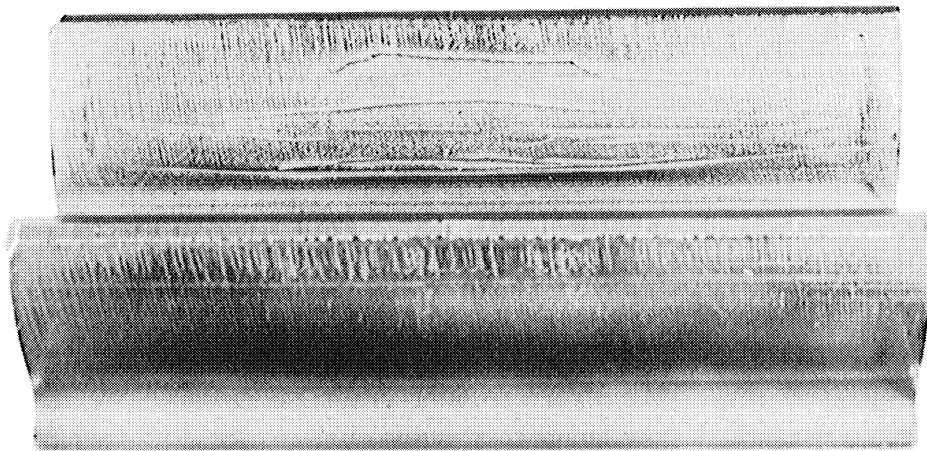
Initial appearance of case crushing on carburized and hardened gear.
